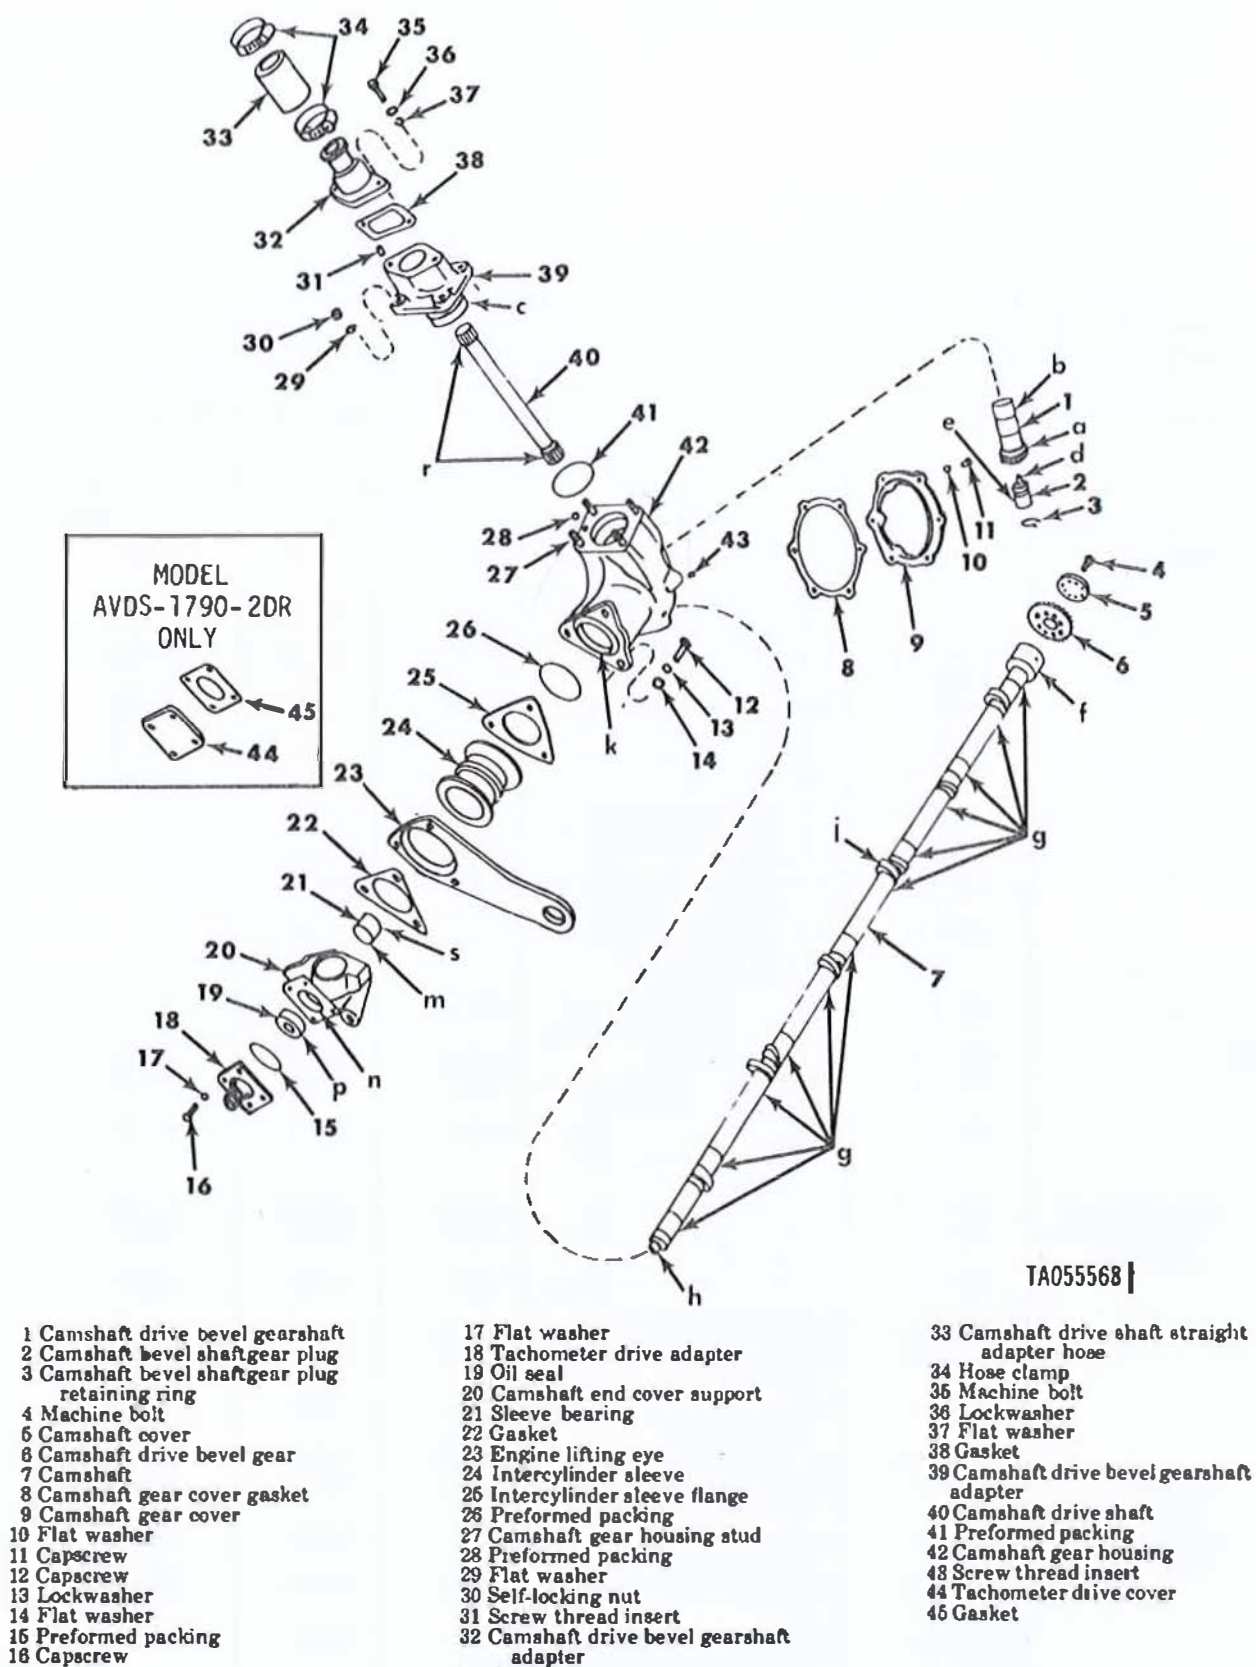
Camshaft and drive gears (right bank) - exploded view.
